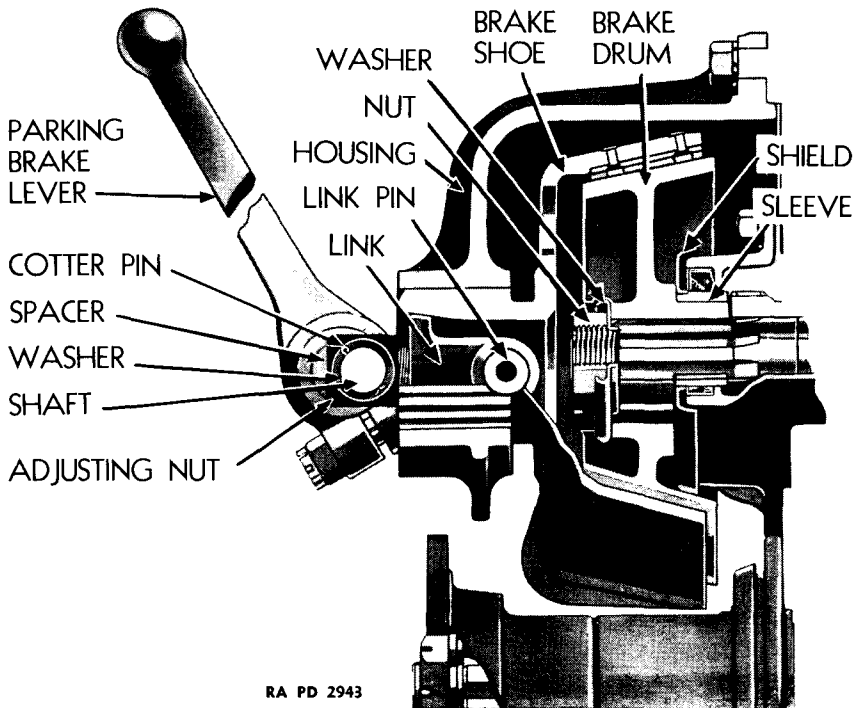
CUT-AWAY OF PARKING BRAKE
